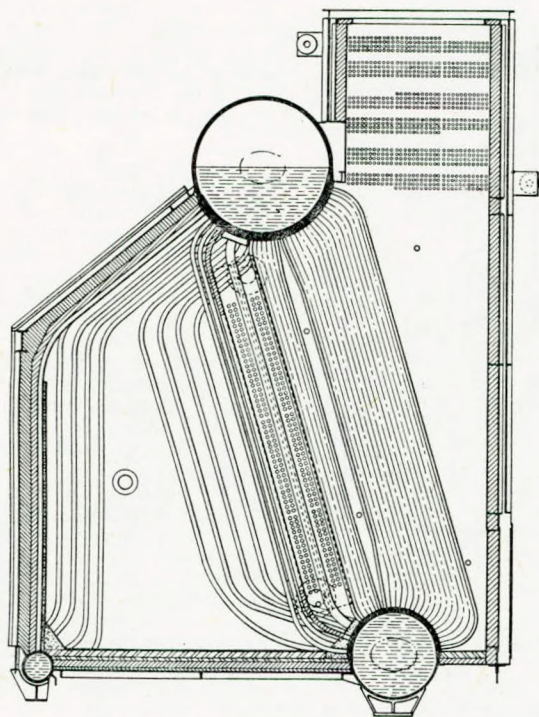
Front view section of two drum boiler with superheater and economizer.
